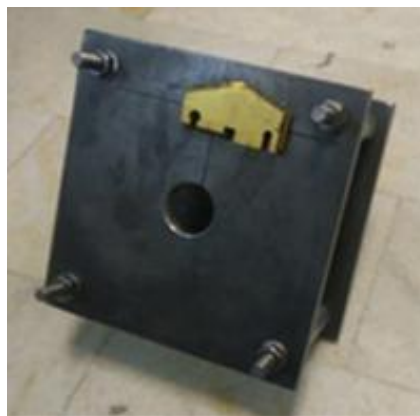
View of the holding fixture of the sample in the impact test facility, and how to fix the sample piece on the fixture
